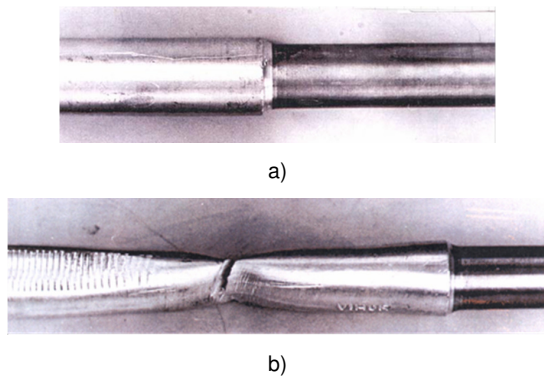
Sample for tensile test (a) and high-quality welded joint after test – fracture in base metal (b)
